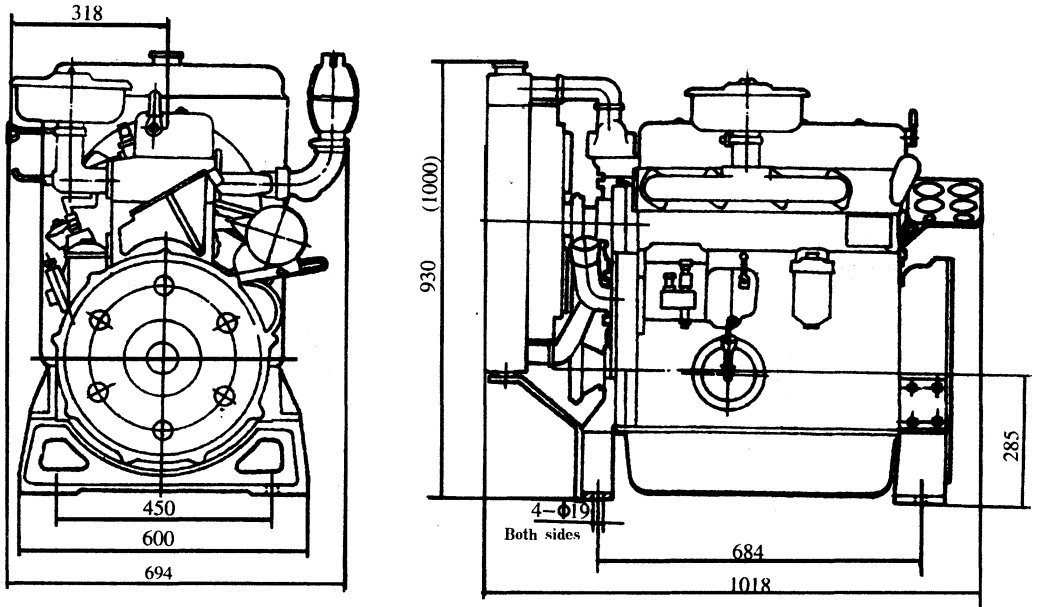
Outline drawing for 495Y - 1 , 495Y4 diesel engine
